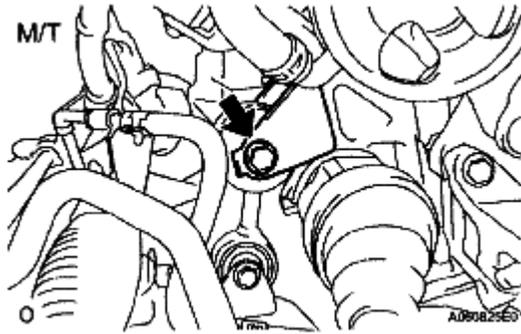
Locating Engine Lateral Control Rod With Bolt
